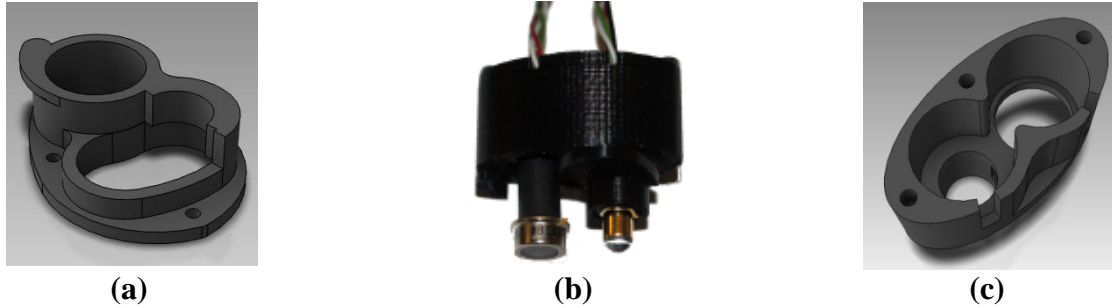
Double optode socket and housing design for small distance channels: (a) Double optode socket design, (b) A photo of the double optode socket with the two PCBs installed, (c)
